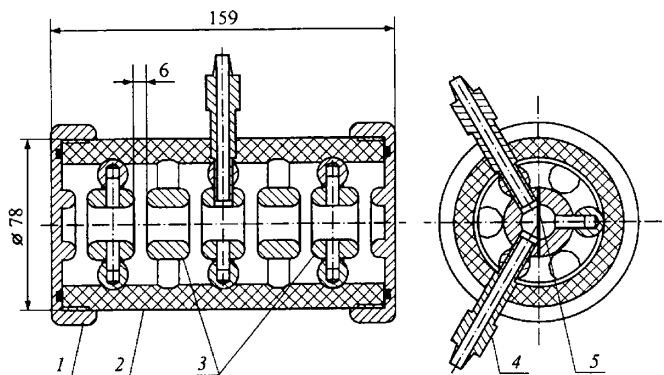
Schematic diagram of the LTD cavity switch. The operating maximum voltage is ± 100 kV and the maximum current 25 kA. The switch components are: 1—cover flange; 2—cylindrical nylon housing; 3—spark gap electrodes; 4—tube for inlet and outlet; 5—rod holder of corona voltage grading needles. The dimensions are in mm. The cross section of the switch is taken through the middle electrode [11].
